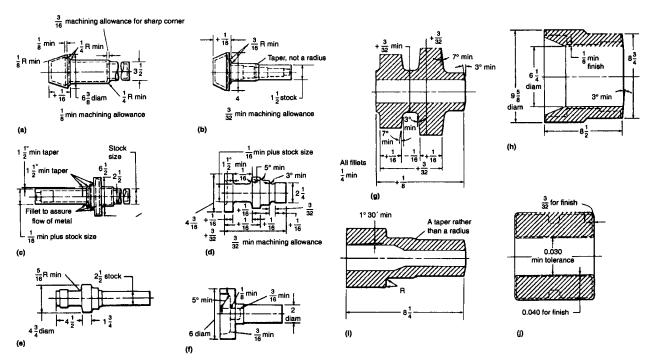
Design practice for upset forgings in which specifications depend on position of flash in workpiece. Tolerances (shown with + or - sign), allowances, and design rules for upset forgings. See text for discussion. Dimensions given in inches
